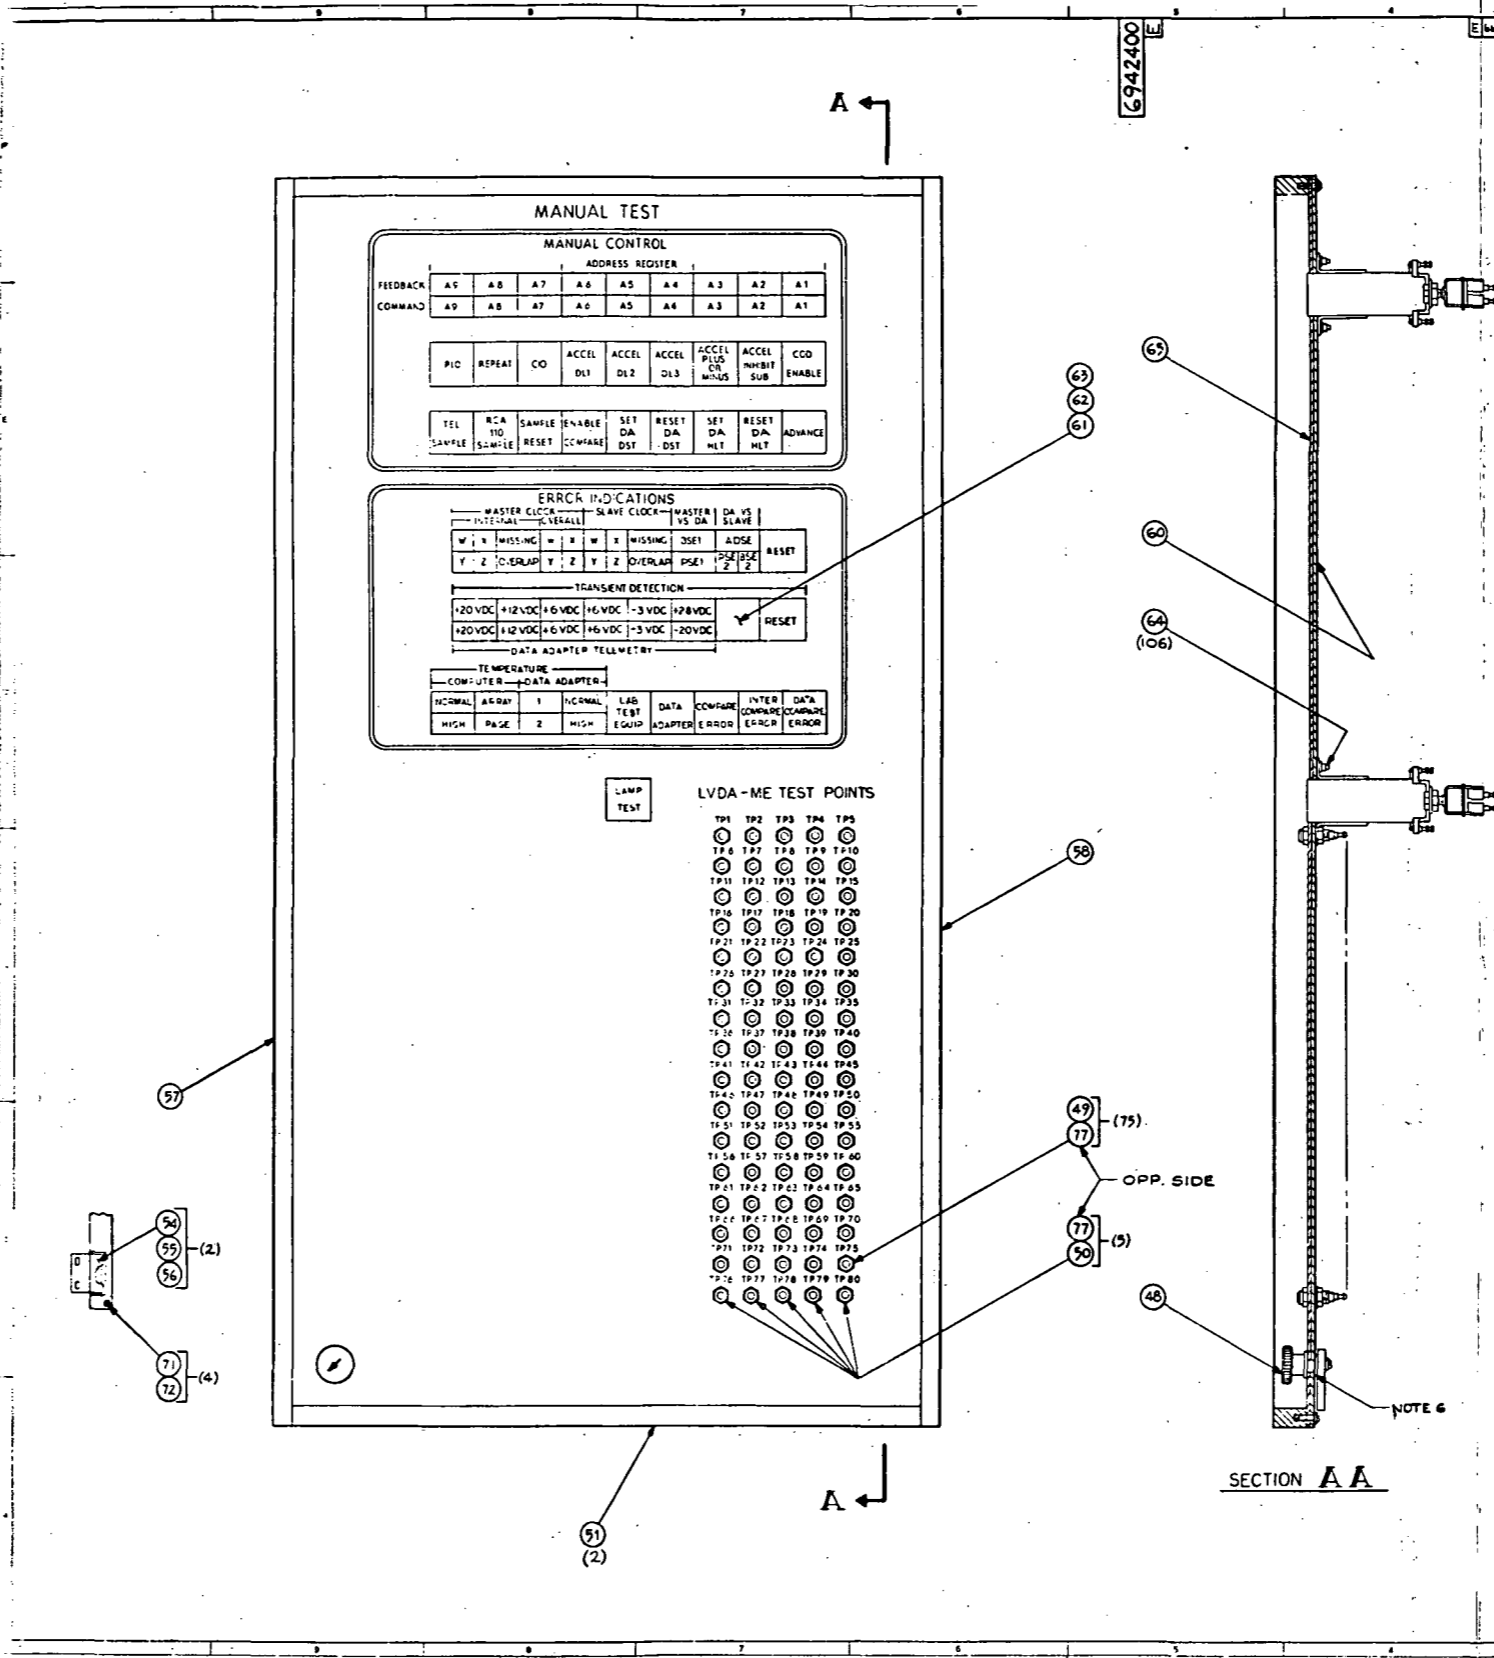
Interface Monitoring Panel (01A1) Assembly Drawing (Sheet 2)
